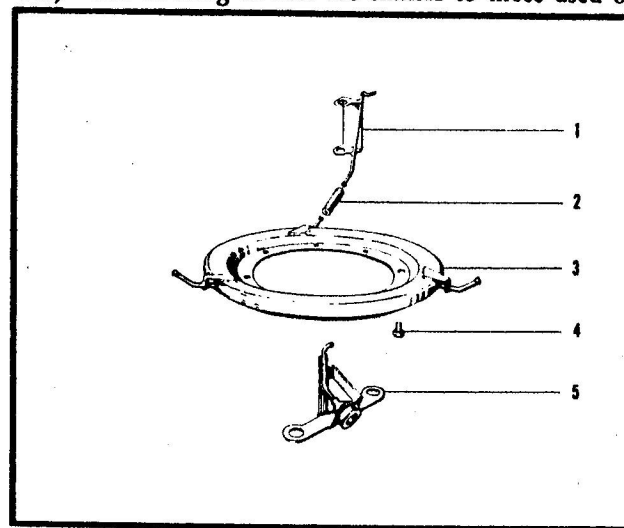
Engine Shaft Extension Assembly for Model 33D50
